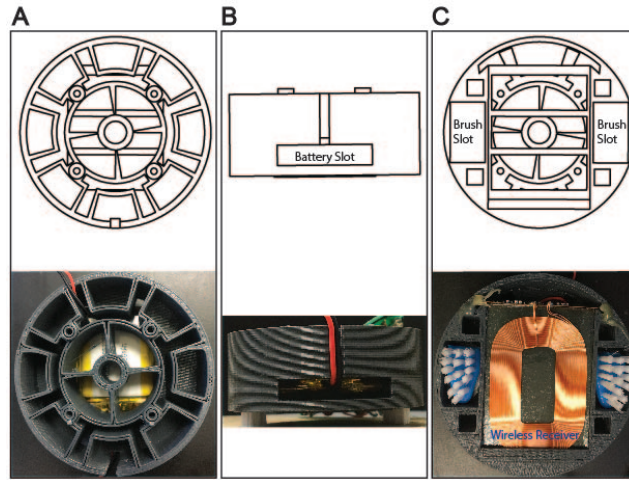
Cross-sectional views of the BOBbot mechanical design. SolidWorks designs and assembled versions of (A) the BOBbot shell and magnet slots, (B) the battery slot, and (C) the brush slots and wireless QR charge receiver.
